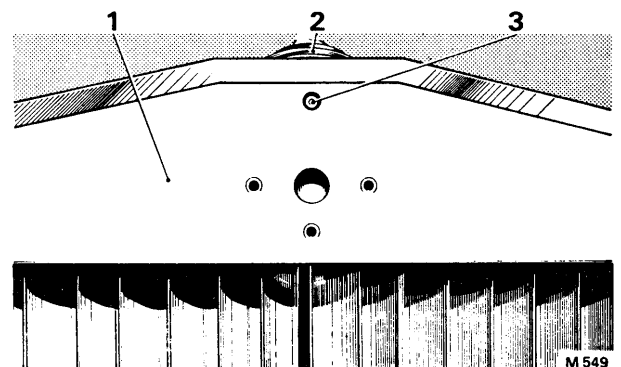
POSITION OF THE RADIATOR MASCOT SECURING SCREW
